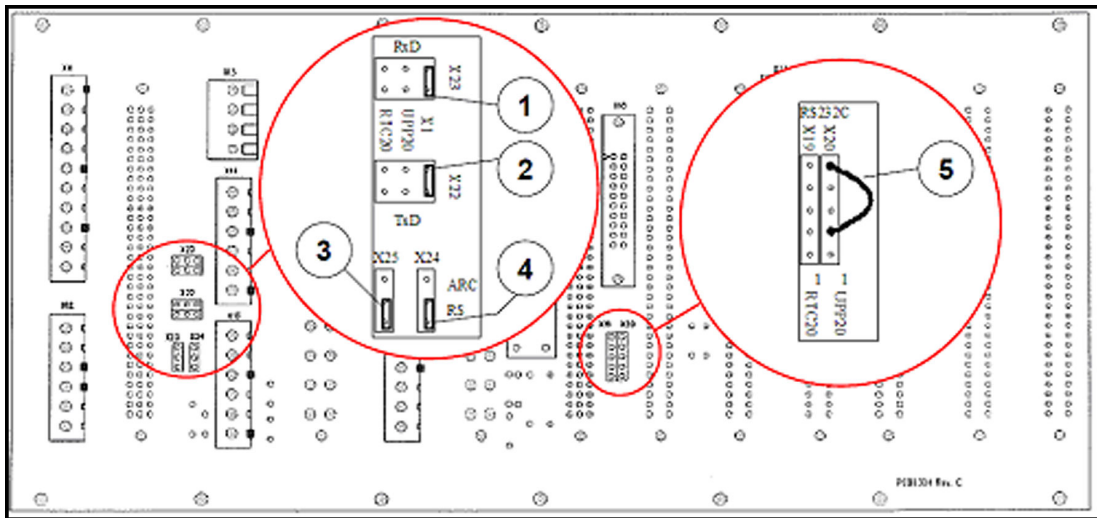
Connecting Jumpers 1-4 and Jumper Wire 5
